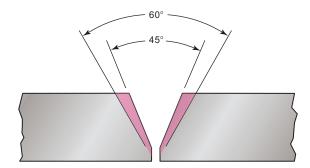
A smaller groove angle reduces both weld time and weld metal.
